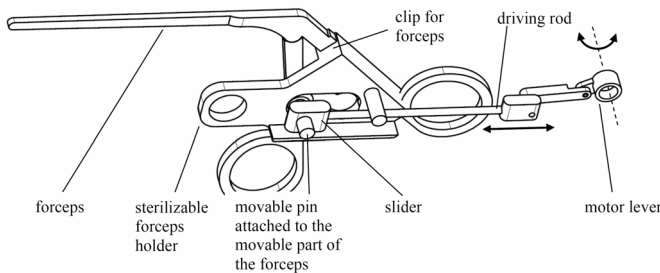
Slider-crank mechanism with motor lever, connected to the sterilizable forceps holder. The movable pin is pressed through the sterile foil (not shown) into the slider.
